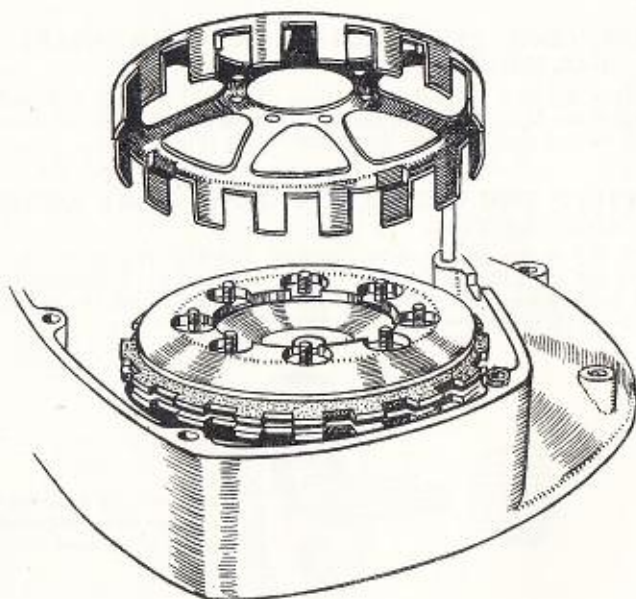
Clutch alignment tool LET 791 should be used to line up the clutch plates.
